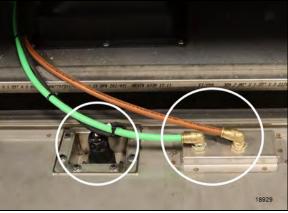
FRONT BUMPER AIR LINES AND ELECTRICAL CONNECTOR
